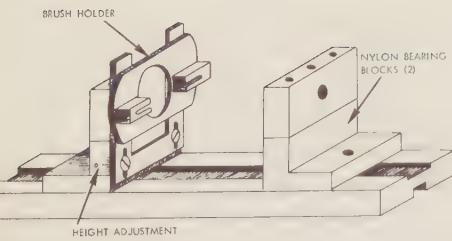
This is a special fixture designed to hold an armature for laboratory evaluation of individual motor components. The armature is supported in nylon bearing blocks, which are removable and adjustable to provide conditions of misalignment. One bearing support has an adjustable frame on which a brush holder assembly is mounted for a test. Several types of motor noise can be studied using this single fixture.
